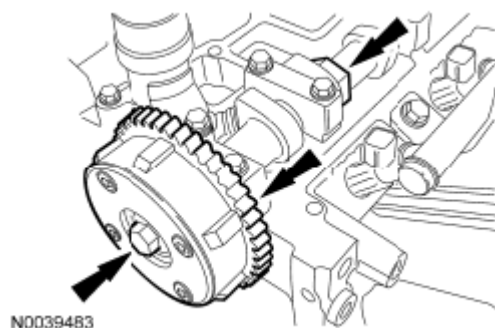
Locating Flats On Camshaft, Bolt, Camshaft Phaser & Sprocket
